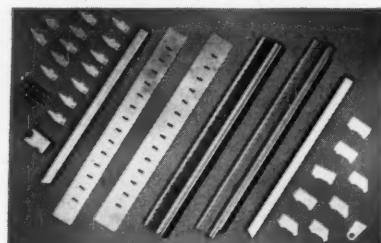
Disassembled parts of the knife frames. Weight was reduced 10 per cent, cost 30 per cent, by utilizing new method of construction
